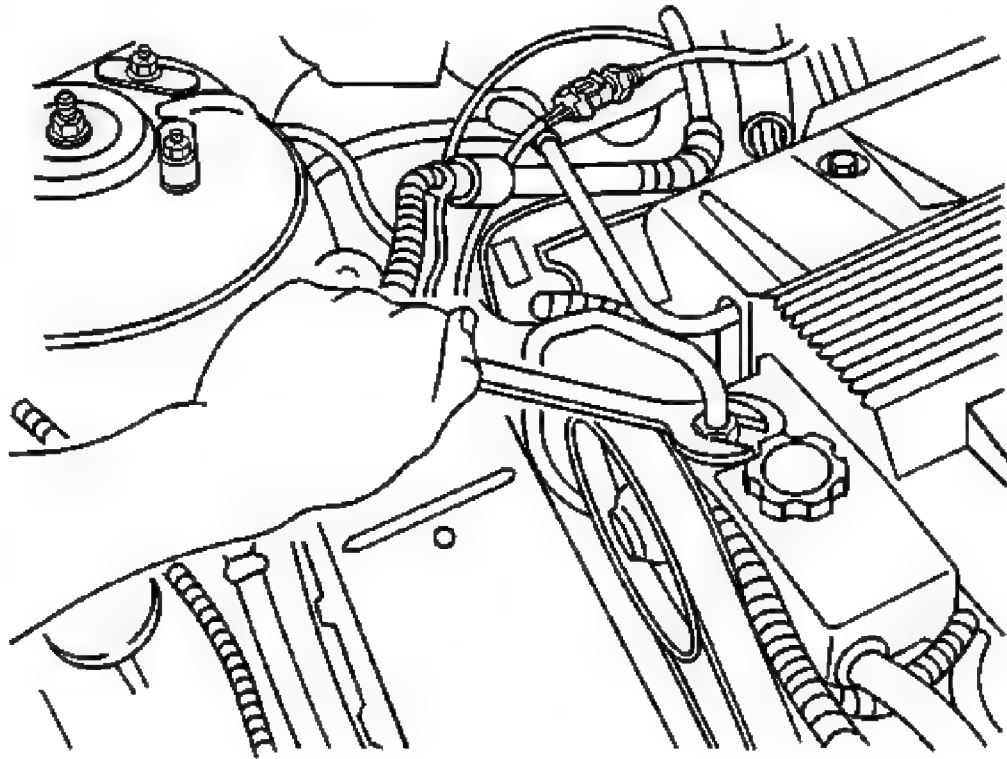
View Of Power Steering Pressure Hose & Power Steering Pump
